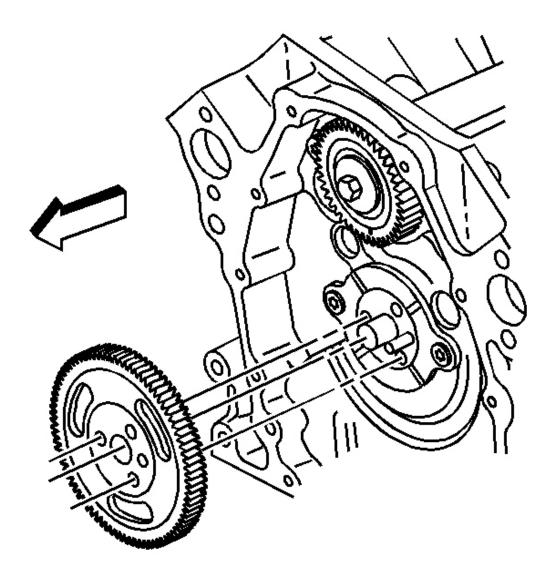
View Of Balance Shaft Drive Gear Courtesy of GENERAL MOTORS CORP.
